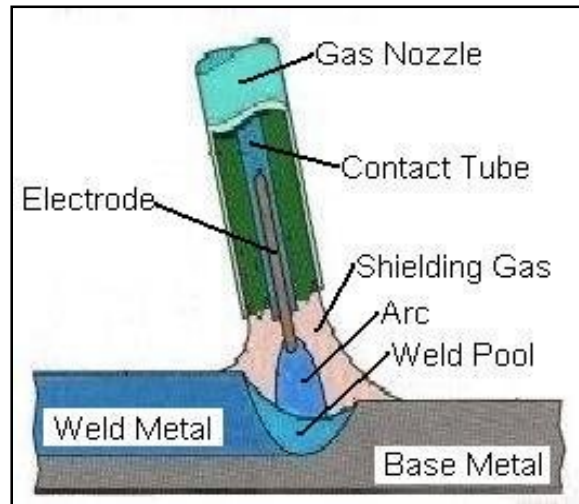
Schematic of Metal Inert Gas (MIG) Welding
